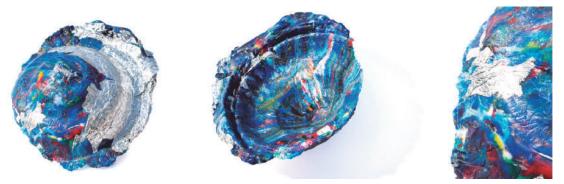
Plaster moulding prototype: 2.1 experience - mould in the furnace with aluminium foil
